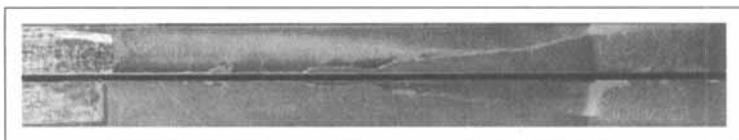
Photograph of the fracture surfaces of the aluminium-alloy (CAE pretreated) joint bonded using the XD4600 adhesive after wet fatigue testing. (The fatigue crack has propagated from left to right.) (See Color Plate V).
